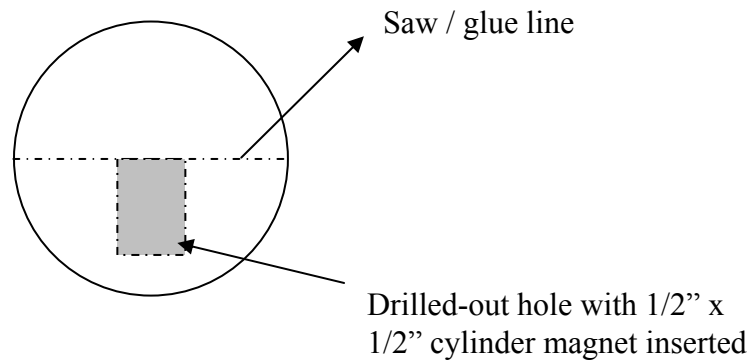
The movable “adatom.” An alternative approach would be to drill all the way in from one end, insert the magnet, then plug the hole.
